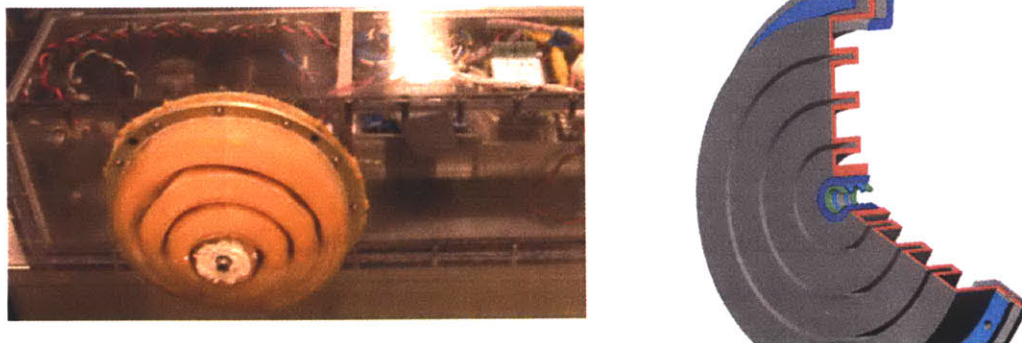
Cone shaped bellow seal, Polidoro [20]. The seal is made of flexible urethane with Shore A hardness of 30 and Kevlar composite. It contains a shaft seal with two buna-n o-rings and Teflon bushings. An inner retaining ring bolts to the Lexan housing while a smaller outer retaining ring compresses the bellow on the outer surface to form a face seal. The useful life of this design was measured to be about 60,000 cycles, before fatigue sets in.
